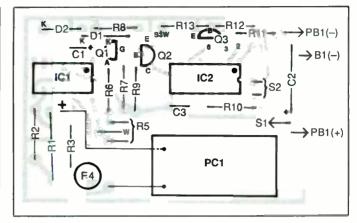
Wiring guide for printed-circuit board. Use this as a rough guide to component layout on perforated board.
